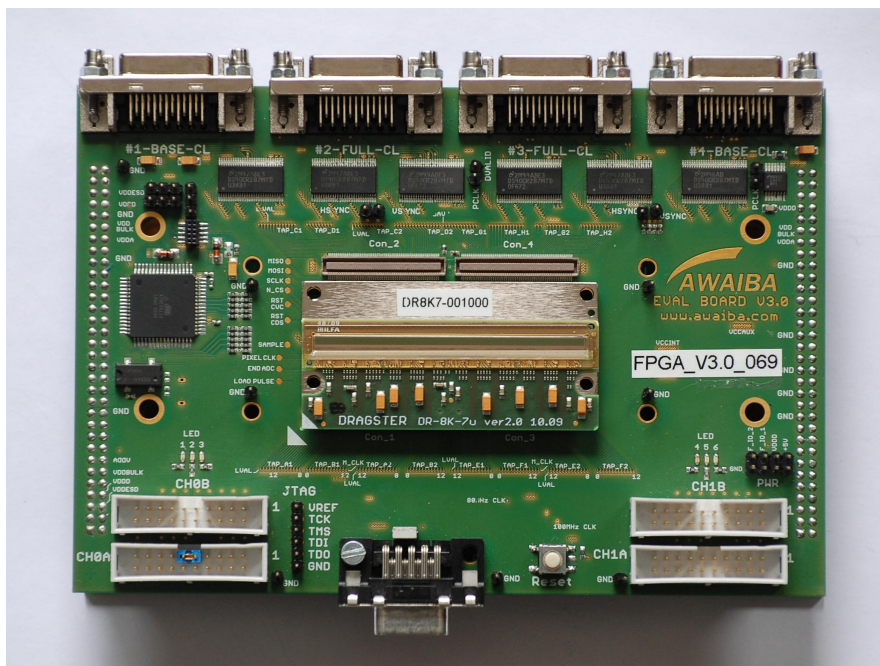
Assembling DR_8K_7um on the Evaluation Board
